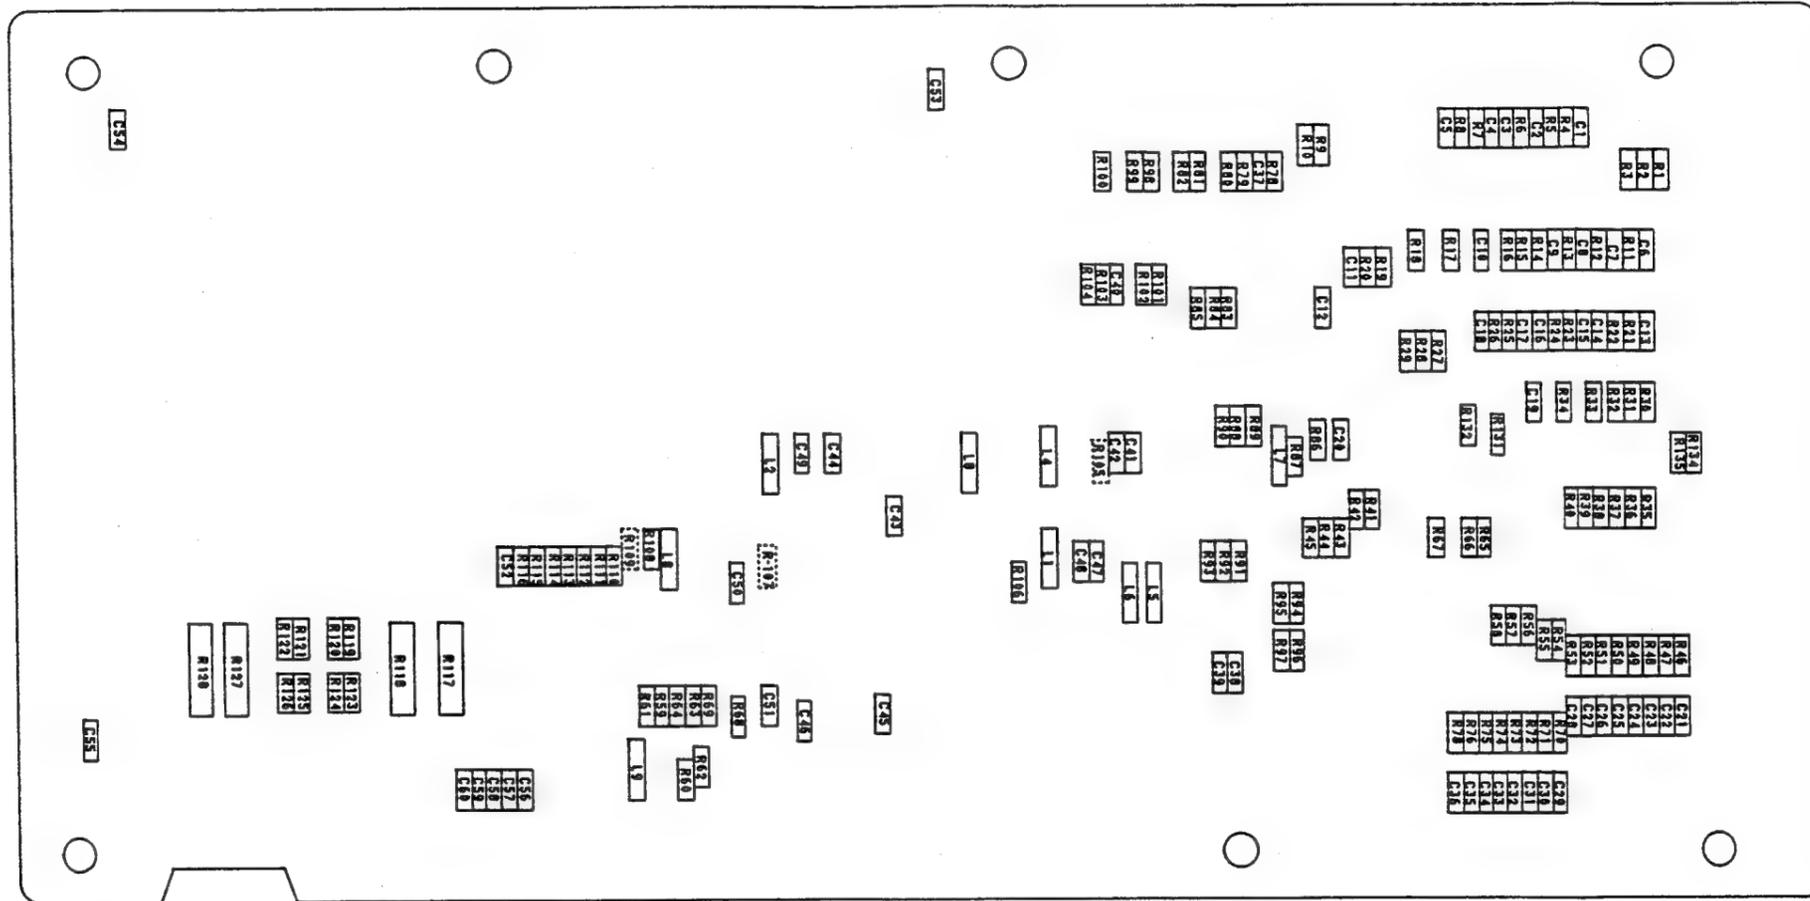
G8ESQA PCB Assembly (Component Side)
